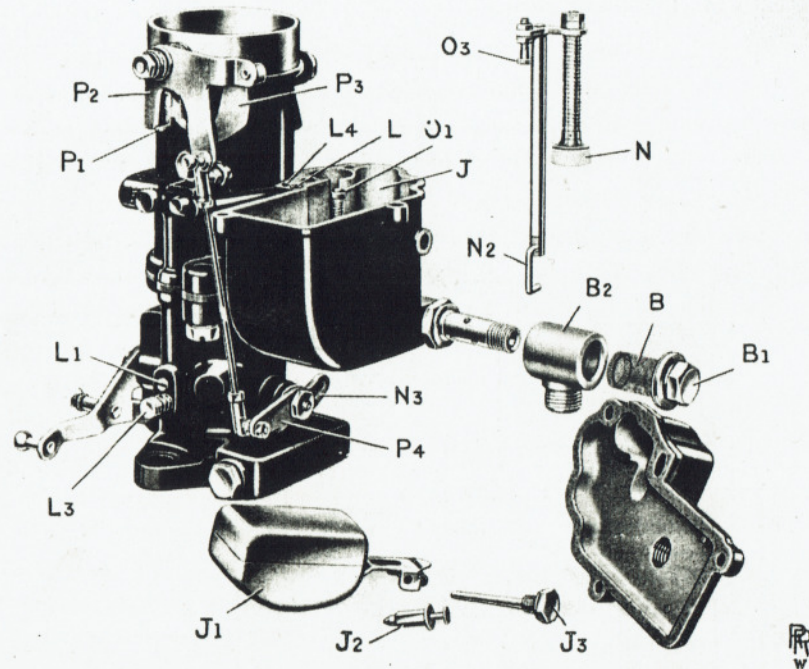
CARBURETTER PARTLY DISMANTLED.
